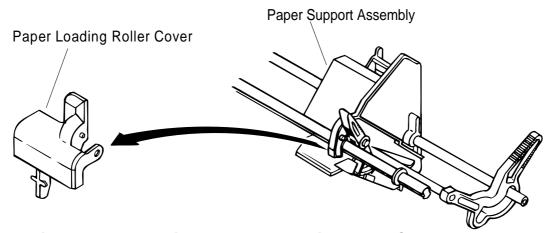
Removing the Paper Loading Roller Cover Assembly
